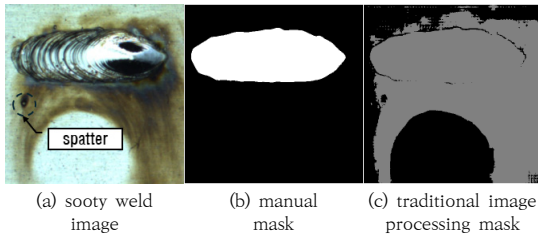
An example of segmentation mask errors using traditional image processing on weld bead with heavy soot
